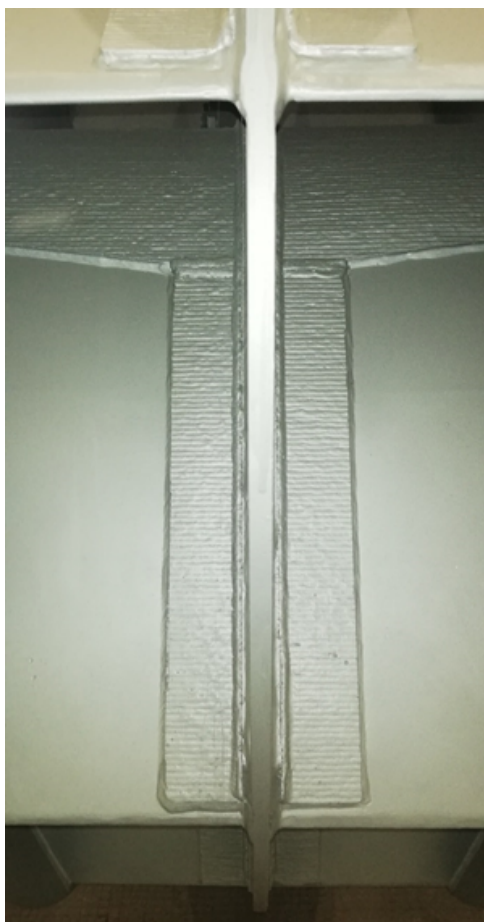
Fan rotor with blade shields made of abrasion-resistant plates
